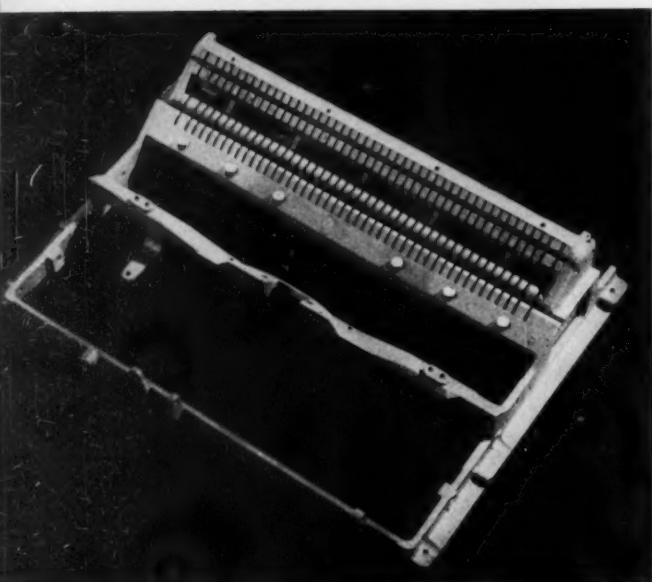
Typewriter Frame in AZ 91 Magnesium Alloy, Die Cast. (Courtesy Industrie-Vaassen)
